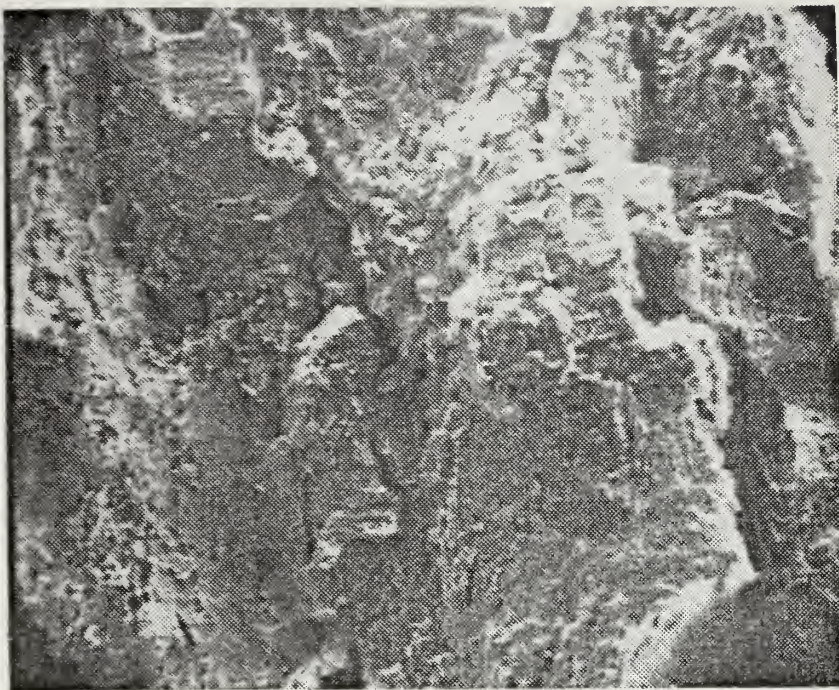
SEM fractograph of a specimen of Fig. 44 in the intersection of fast crack zone and fatigue zone, showing deep secondary cracks normal to the direction of rolling. Tear ridges and dimples are visible. X500.
